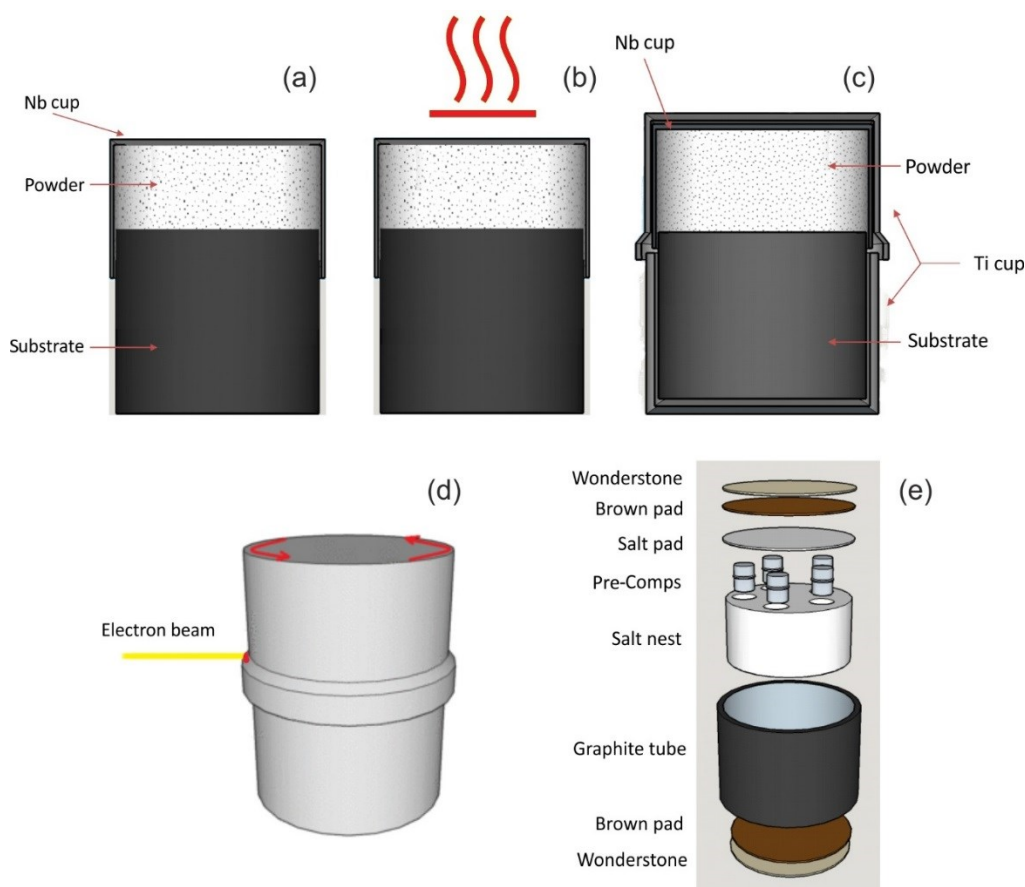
Schematic of the capsule assembly operation preceding the sintering. (a) powder pre-compaction on carbide substrate; (b) outgassing; (c) and (d) capsule sealing; (e) assembly of several capsules in pressure and temperature transfer media for sintering.
